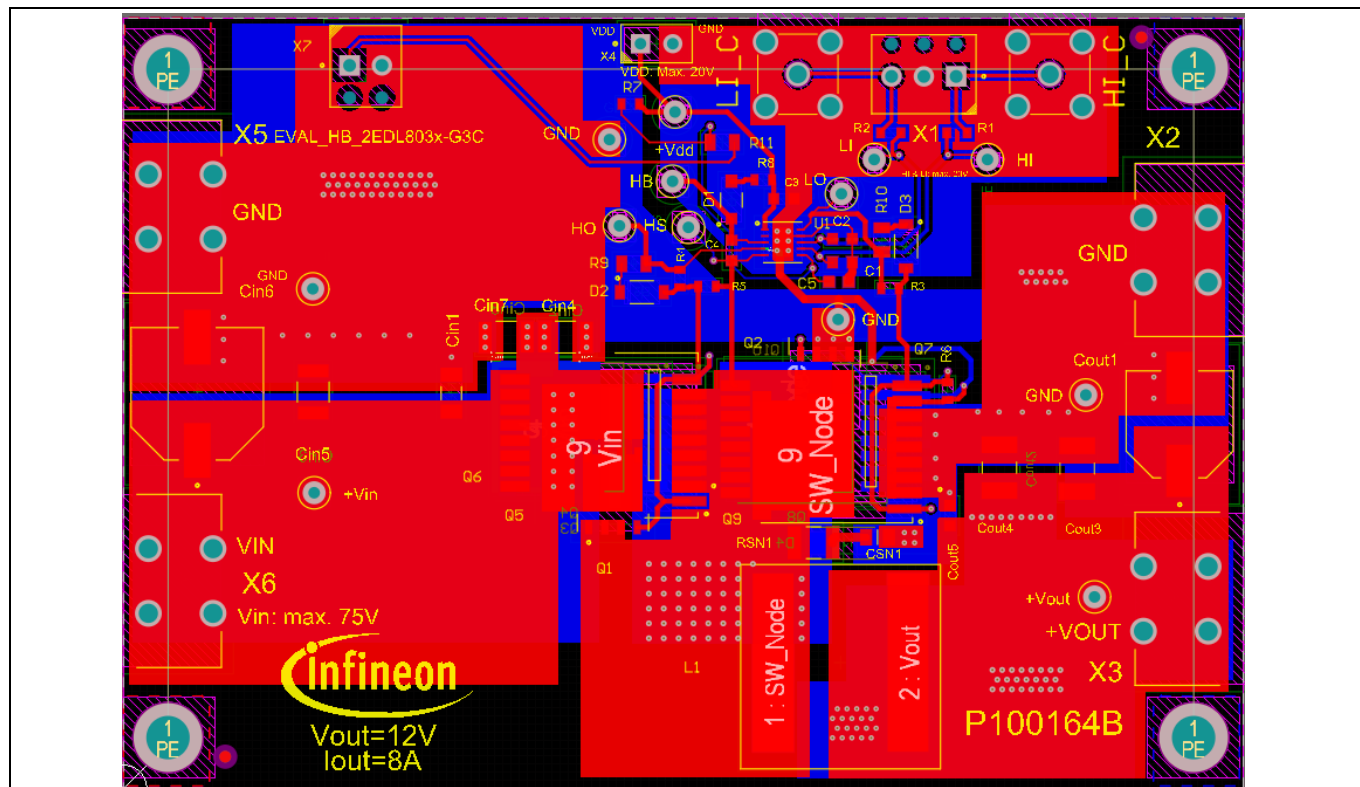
EVAL_HB_2EDL803x-G3C board layout
